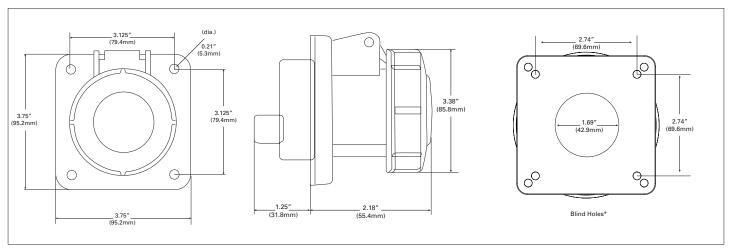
16A 3-P, 4-W Receptacles, Front, Side & Back Views
